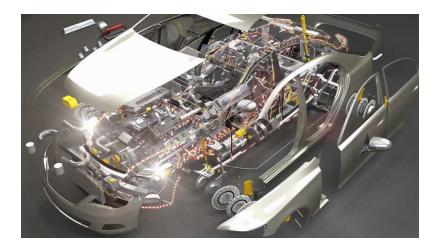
Car exploded view (Source: Mohvisuals)⁹⁵
